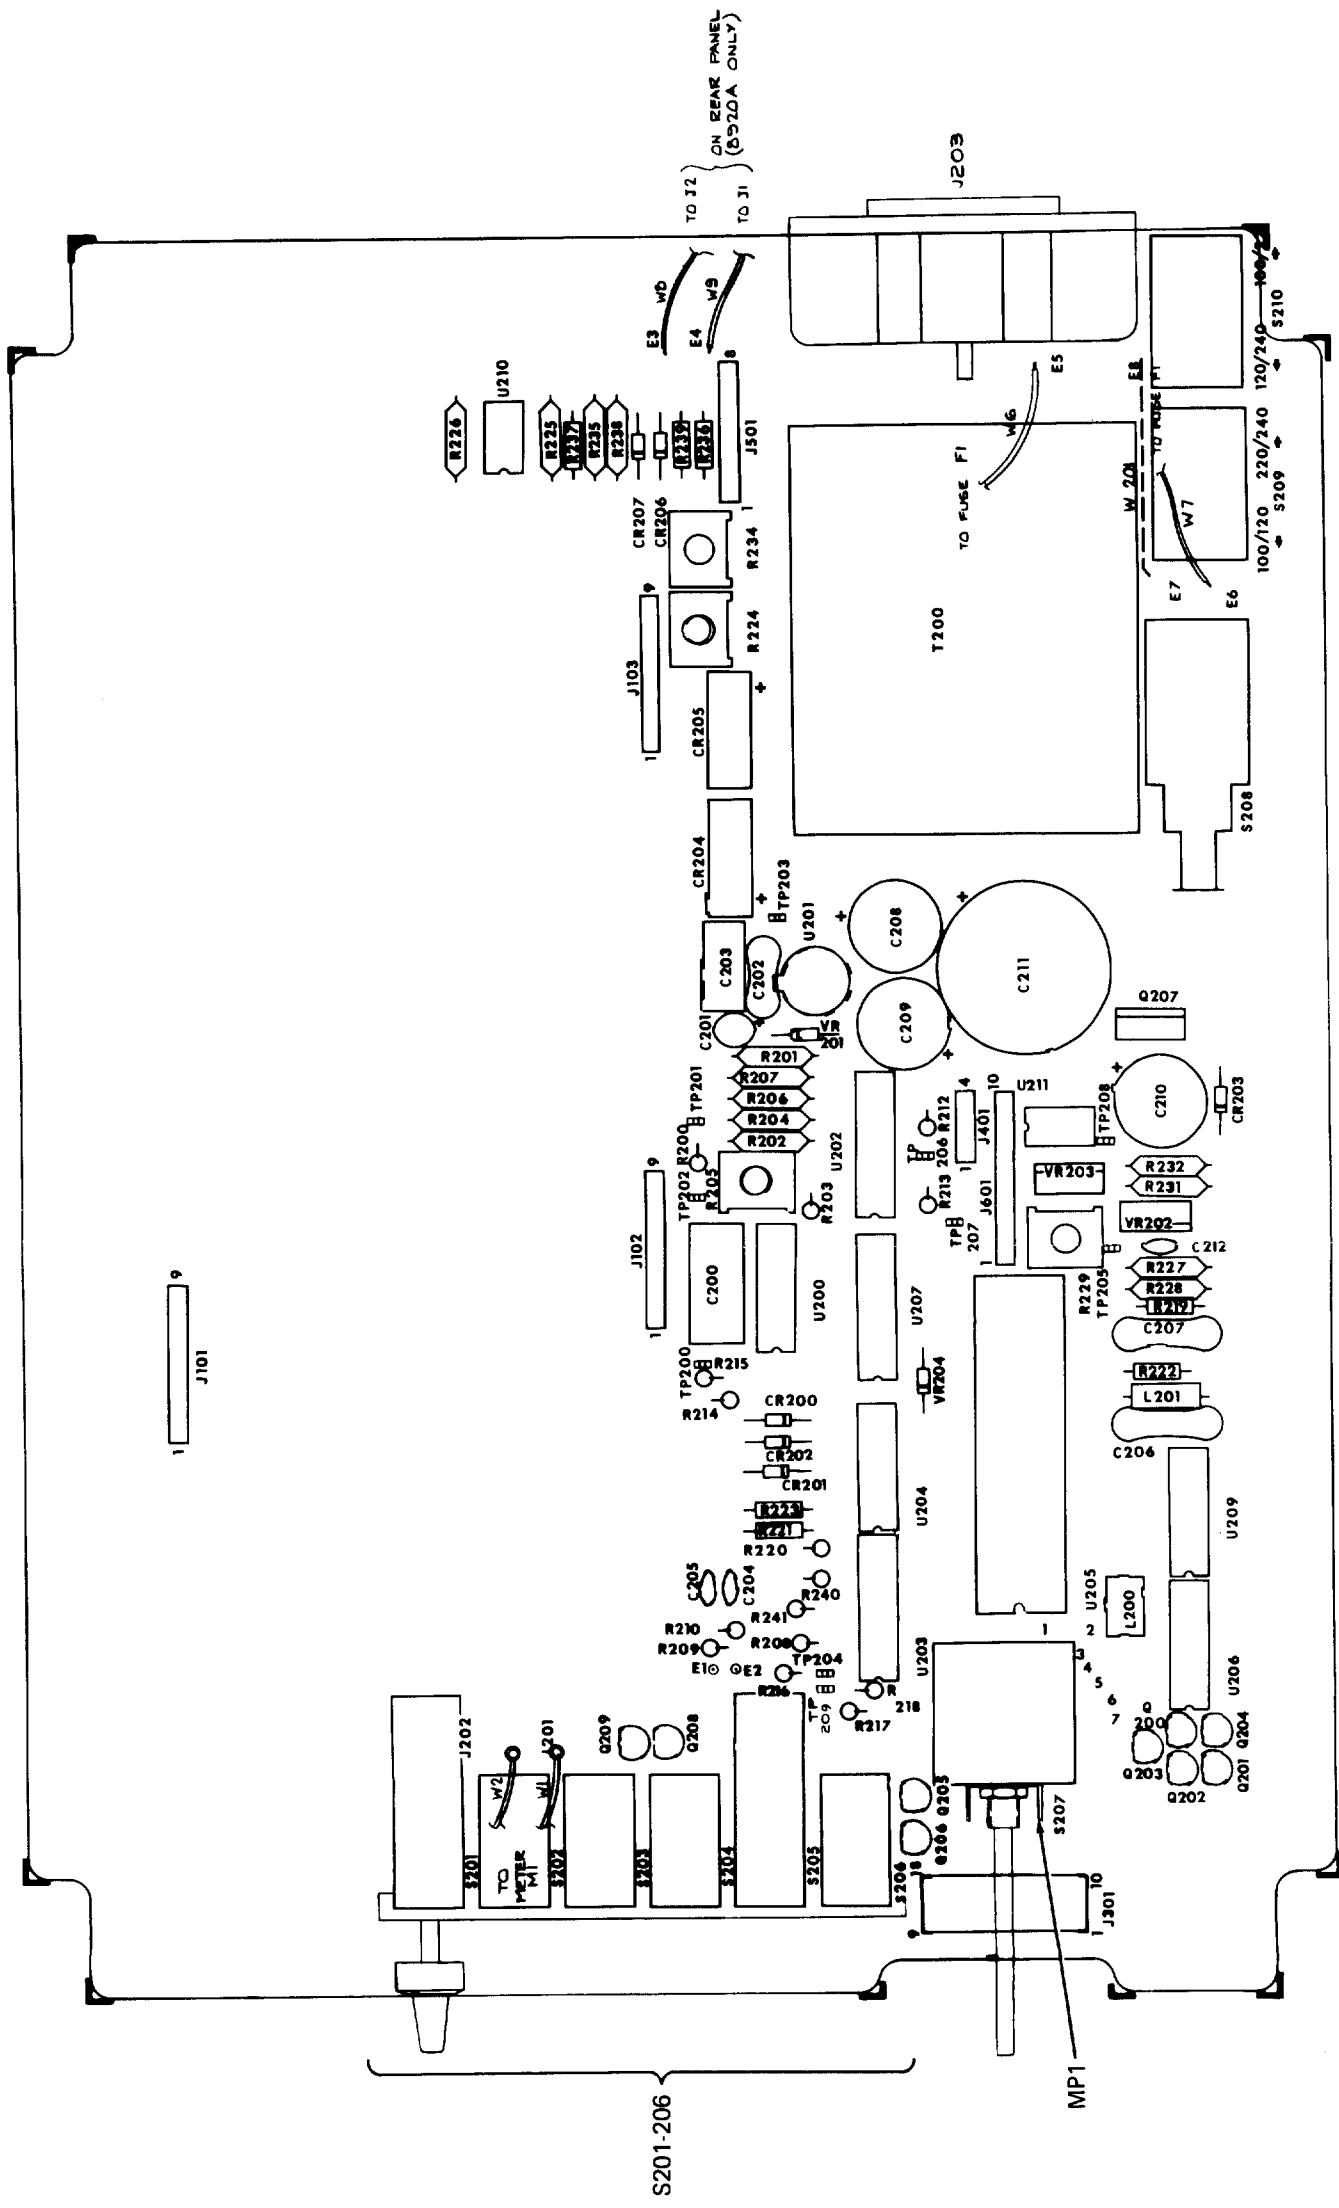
A1 8921A Main PCB Assembly (Sht 2 of 3)
